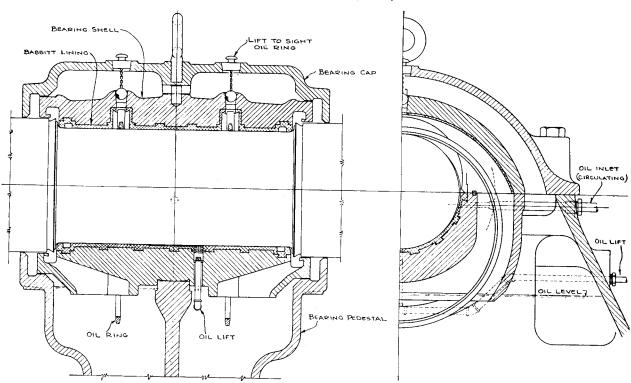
Cross Section View of a Typical Bearing Assembly.
